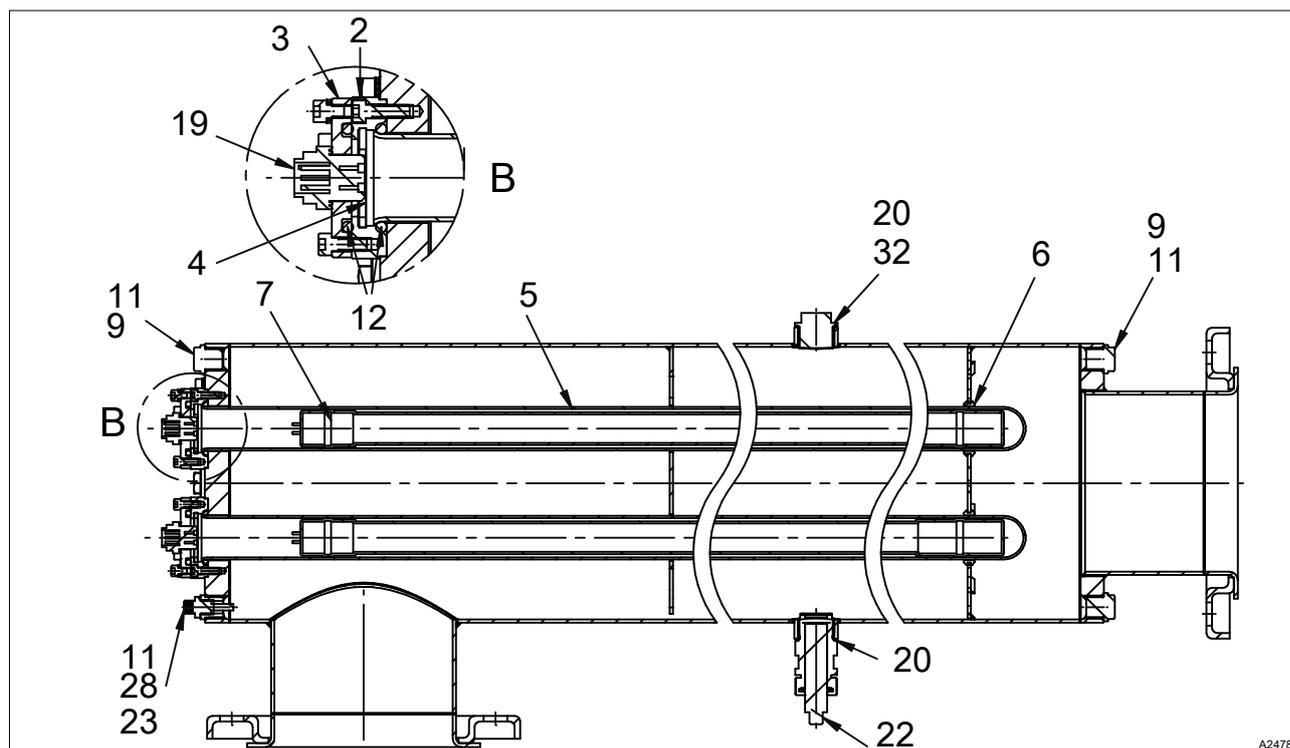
Spare parts, 6x350 W, six lamp system without wiper
